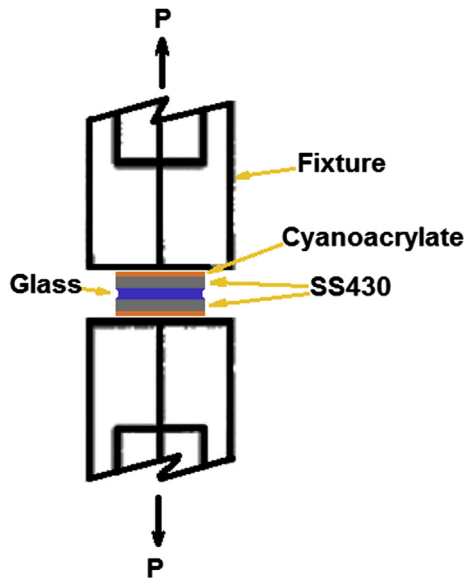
A schematic drawing showing the tensile testing assembly with a joined sample bonded to the grips with glue (cyanoacrylate).
